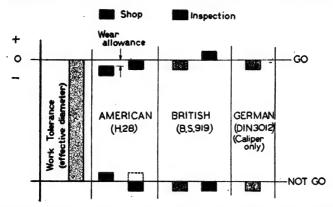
Disposition of Screw Gauge Tolerances—Male Thread Effective Diameter
